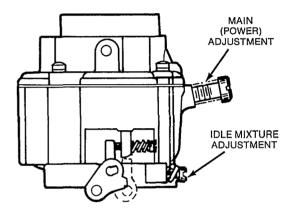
CARBURETOR FUEL MIXTURE ADJUSTMENTS
